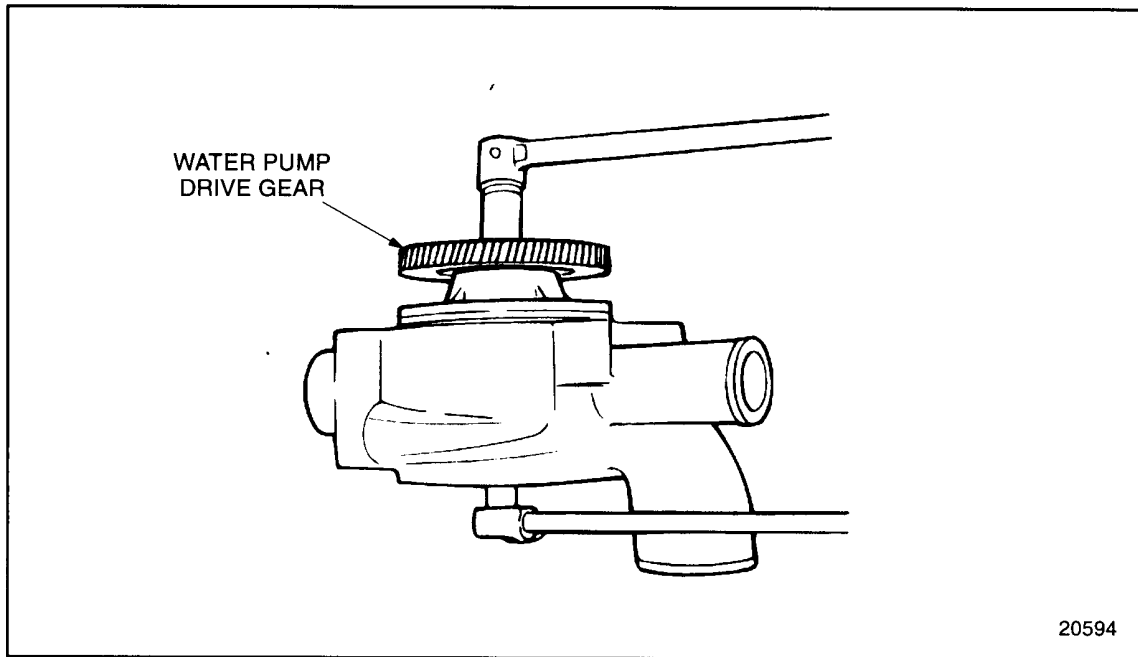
Water Pump Drive Gear Retaining Bolt Removal
